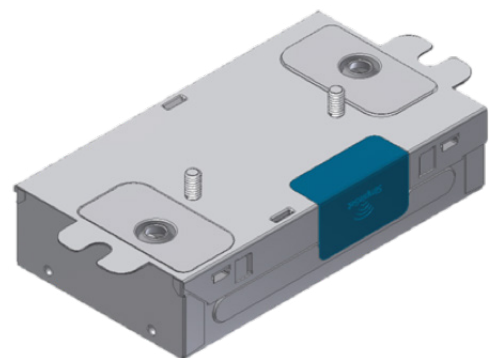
SRB-BS version to mount to (downlight) fixture mounting plate.
